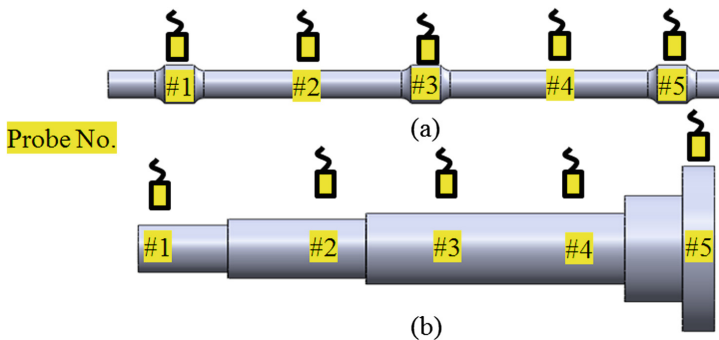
Schematic view on probes location for components of built-up 2 MW gas turbine rotor: (a) Tie rod shaft; (b) Rotor shaft
